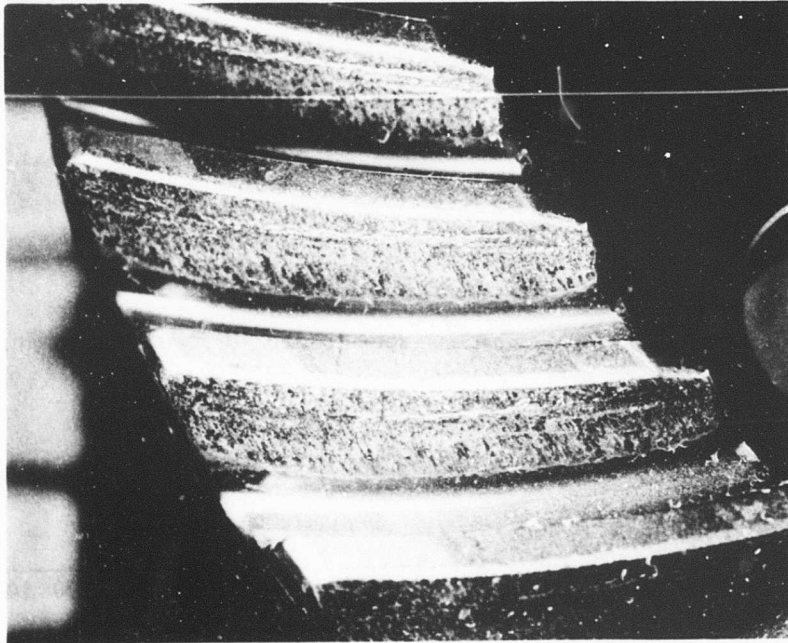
Pinion Assembly After Two Standard Bearing Tests at 65-HP Load, Series 2A.
